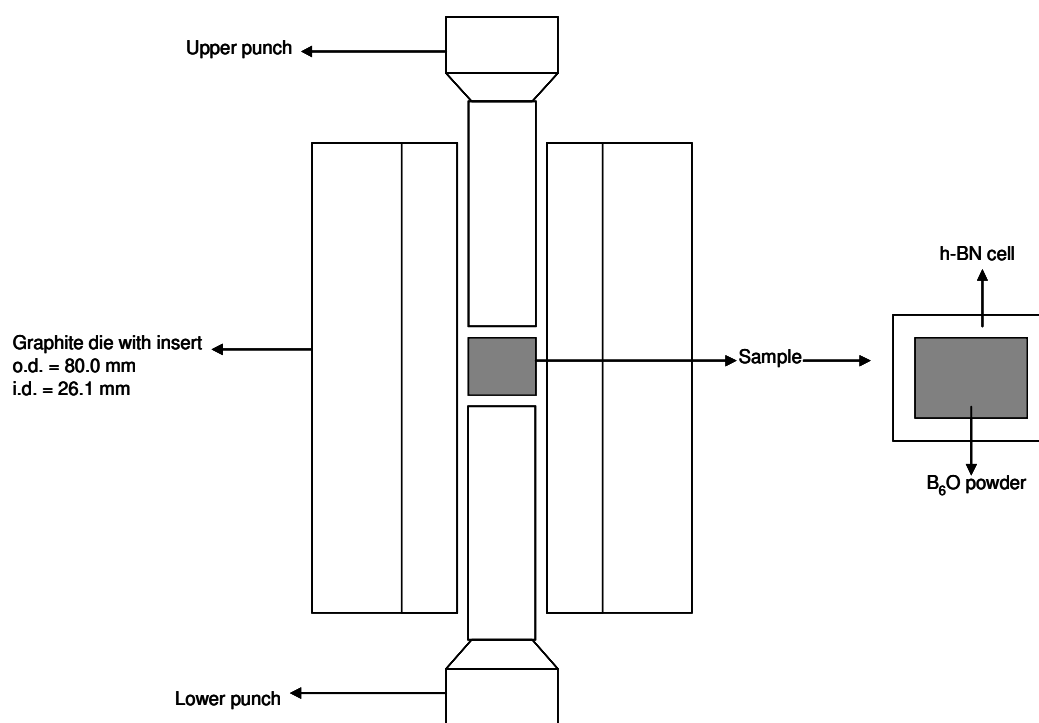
The schematic diagram of the uniaxial hot pressing die assembly.
